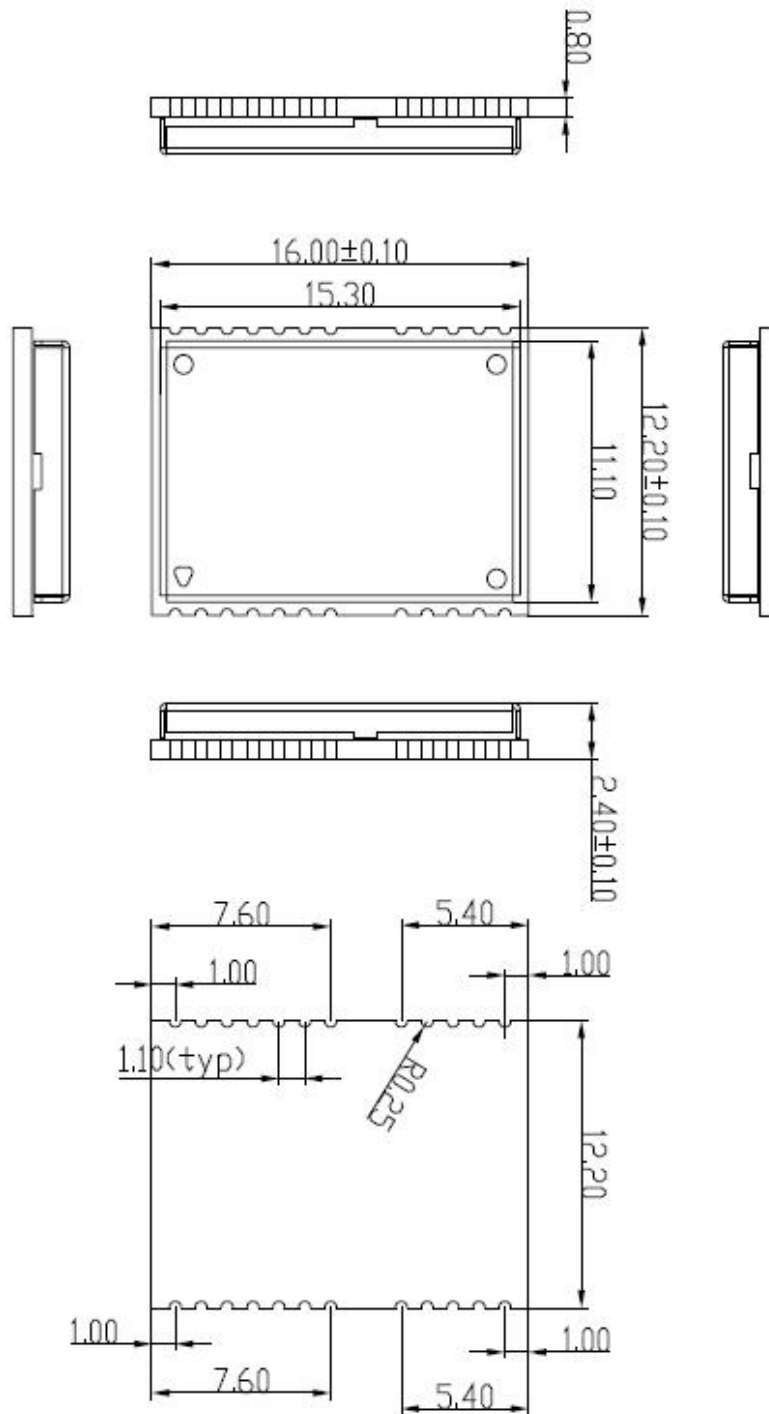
SIM68I mechanical dimensions (Unit: mm)
